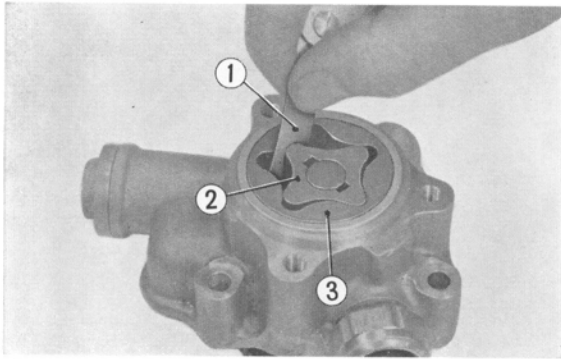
① Feeler gauge ② Inner rotor ③ Outer rotor
